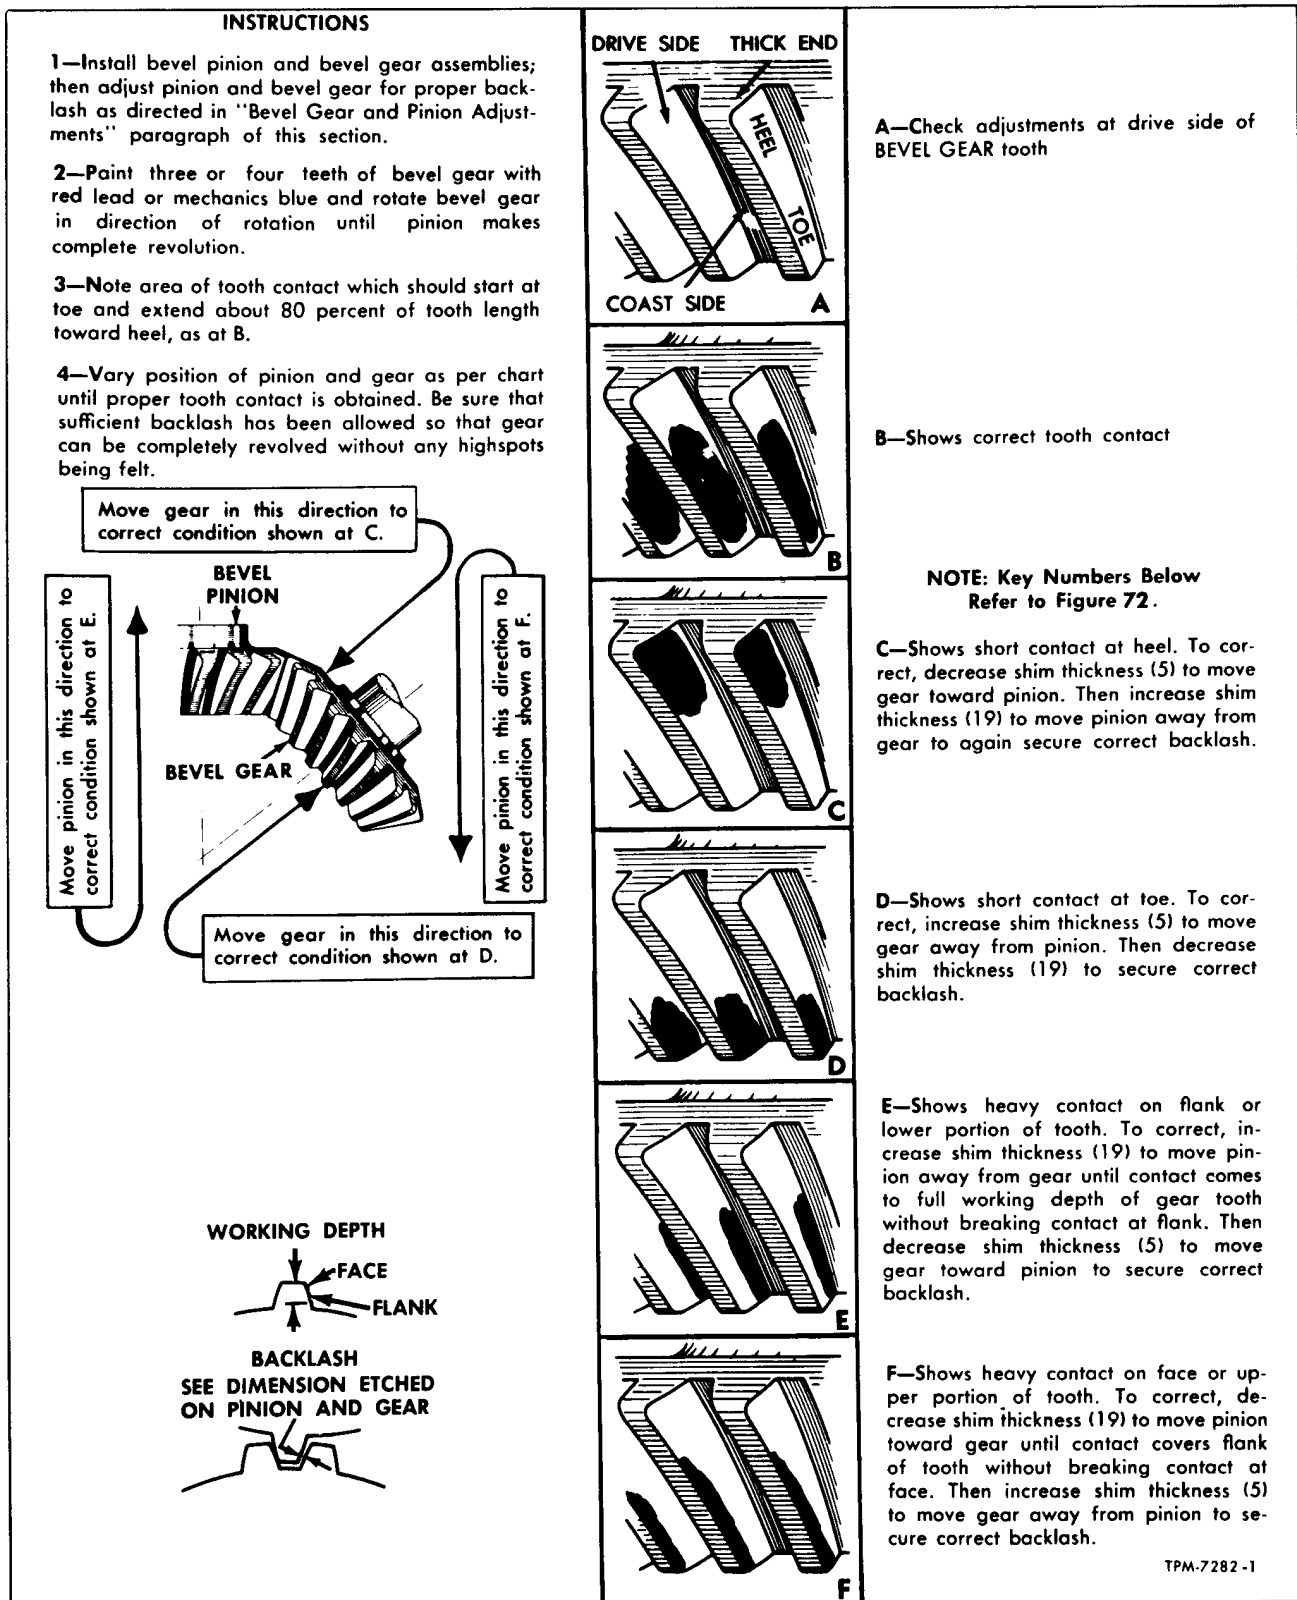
Accessory Drive Bevel Gear and Pinion Tooth Contact Chart
